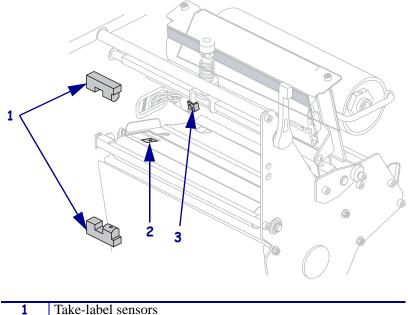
• Take-Label Sensors, Black Mark Sensor, and Ribbon Sensor
